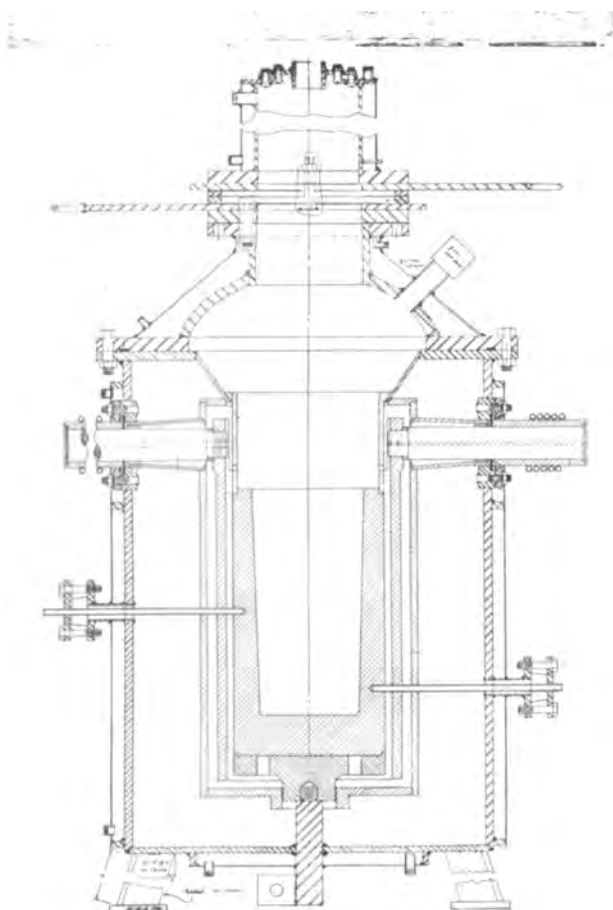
Assembly drawing of modified electrolytic cell with bumped head, gate valves, and cathode removal chamber in place.
